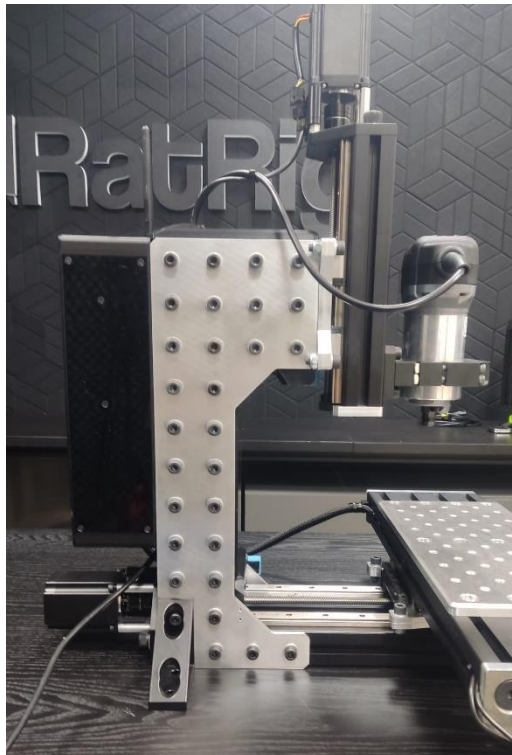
Side view of the Mill prototype, where the tower Z plates can be observed, along with the electronics enclosure on the back of the assembly
